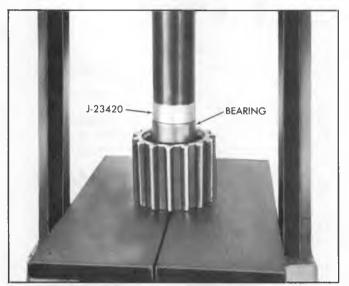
D-Installing Rear Output Shaft Pilot Bearing
